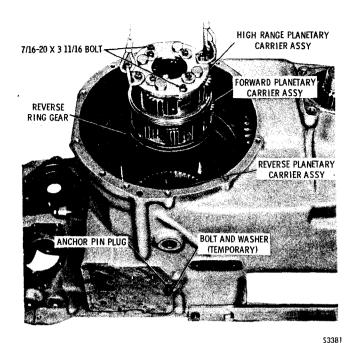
Installing forward and highrange planetary carrier assemblies
